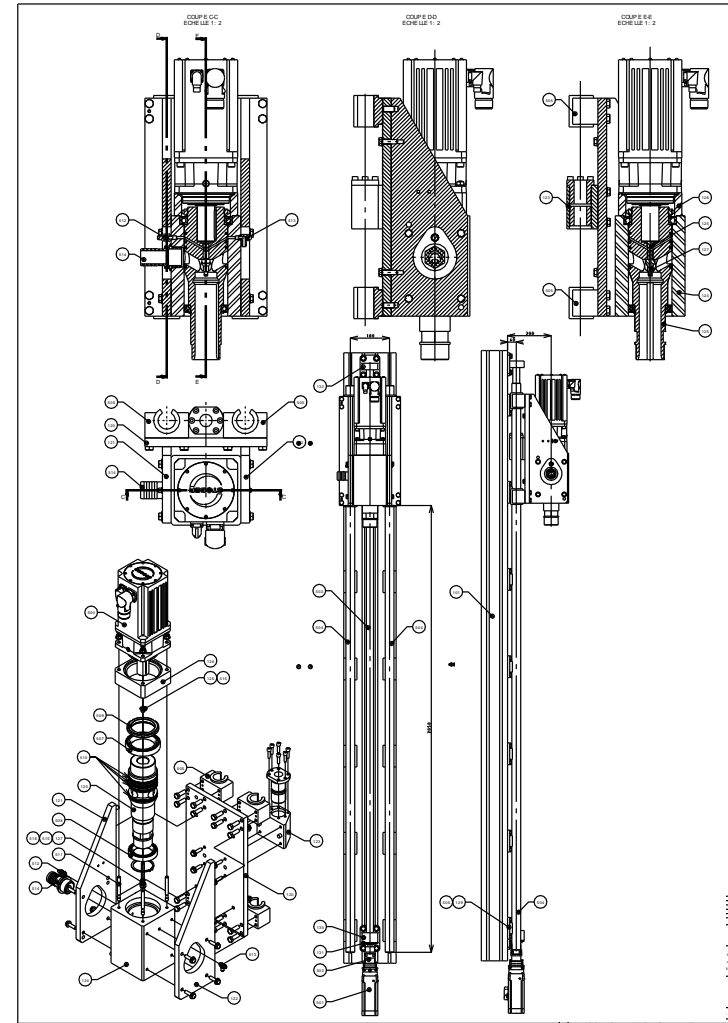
Diagram of the partial assembly of the rod drive mechanism
